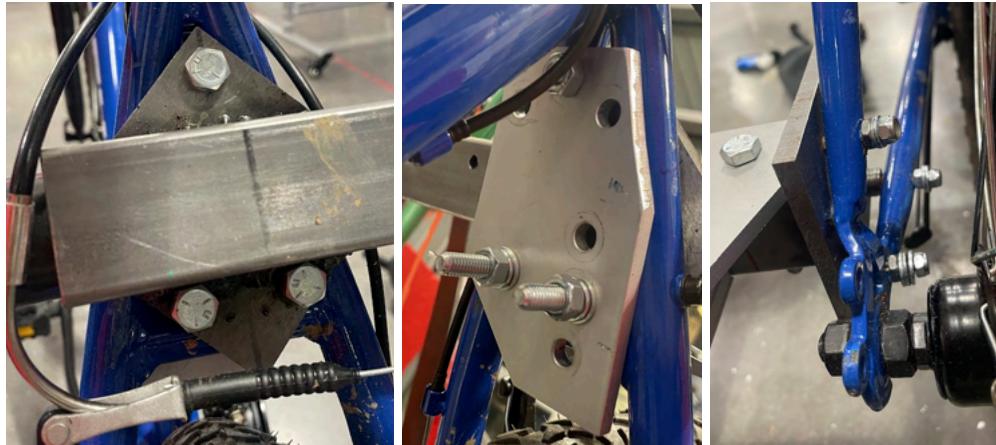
Seat Stay Connecting Bar Attachment and Chain Stay Connecting Bar Attachment
